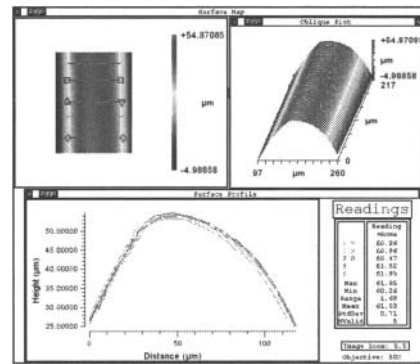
Edge radius measurement of the cutting tool using ZYGO New View 5300
